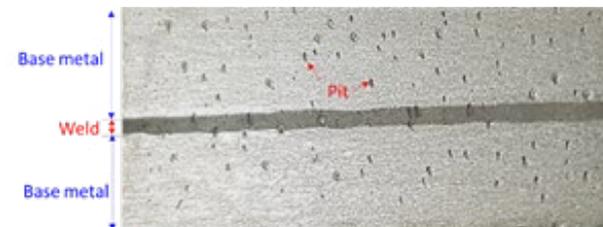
Appearance of pitting made electrochemically in weld and base metal
